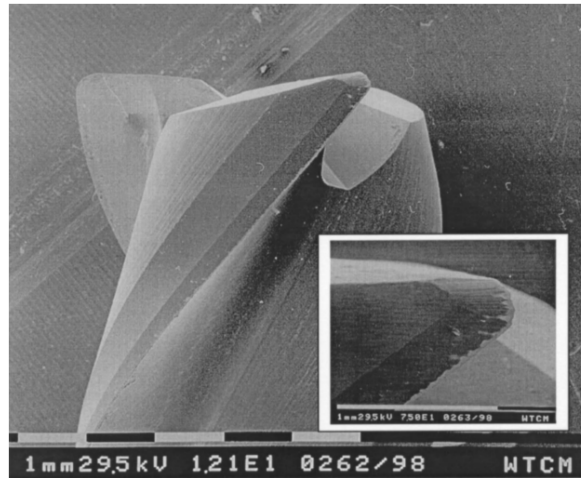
DLC-coated end-mill after 50 m machining. The extent of film abrasion on the cutting edge is shown in the insert.
